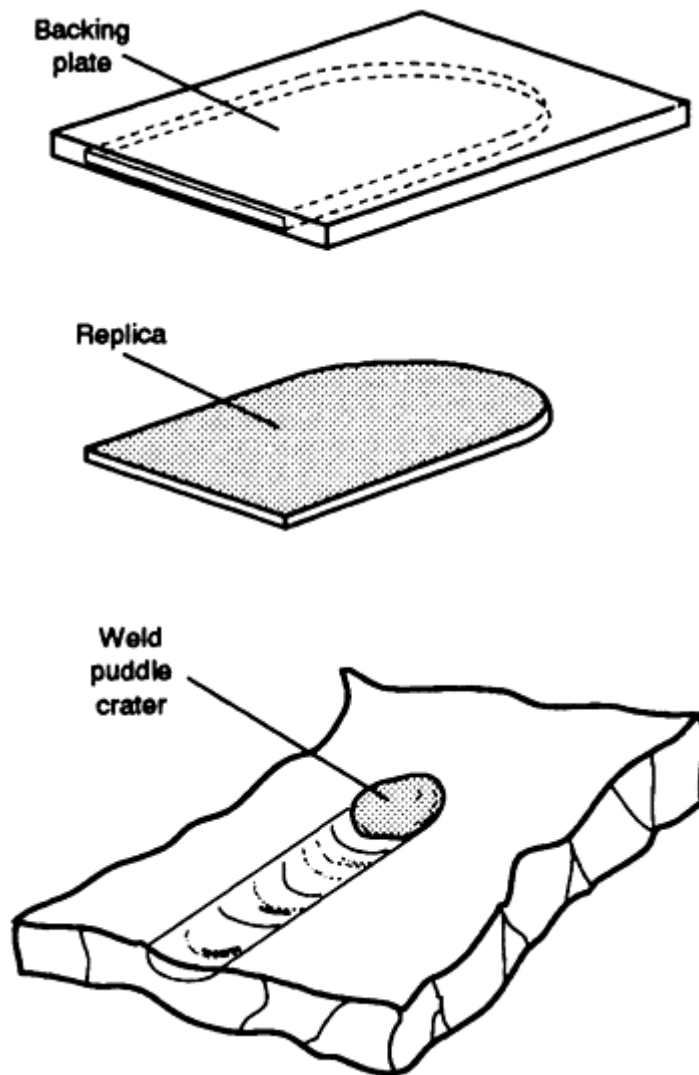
SILICONE RUBBER REPLICATION TECHNIQUE USED TO EVALUATE DECANTED WELD POOL SHAPE. SOURCE: REF 21
